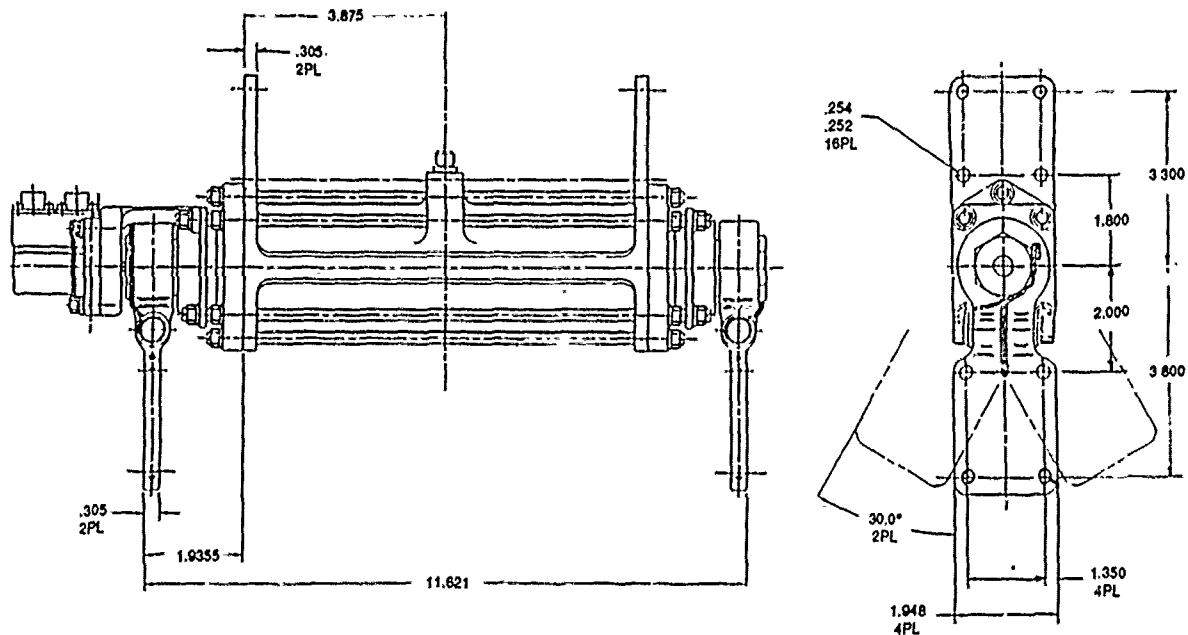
Bendix - Rotary Vane Actuator Outline Drawing
